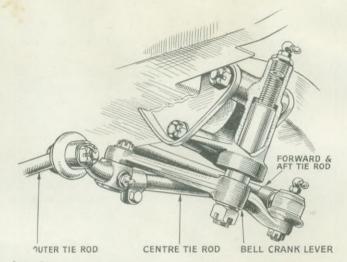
Bell crank lever and bracket assembly fitted to "Renown" models
